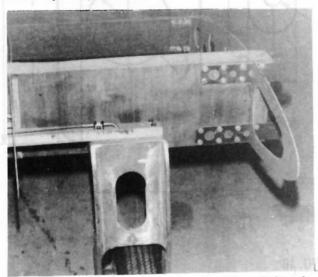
Landing gear and brake cable tube and clamp installed.
